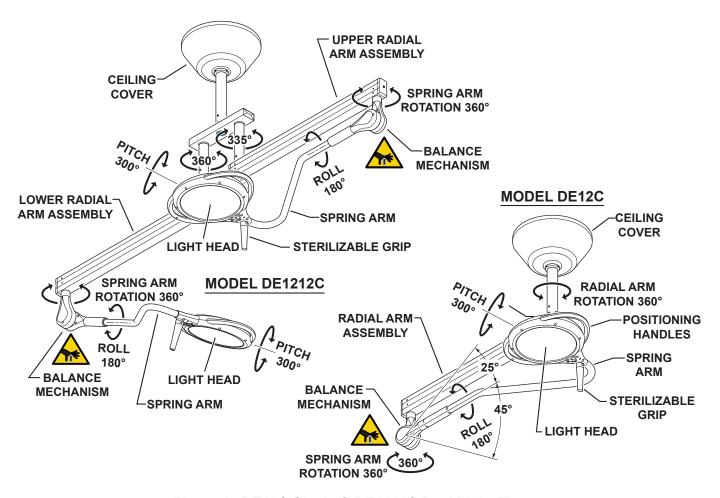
DE12C Single & DE1212C Dual Light Fixtures
